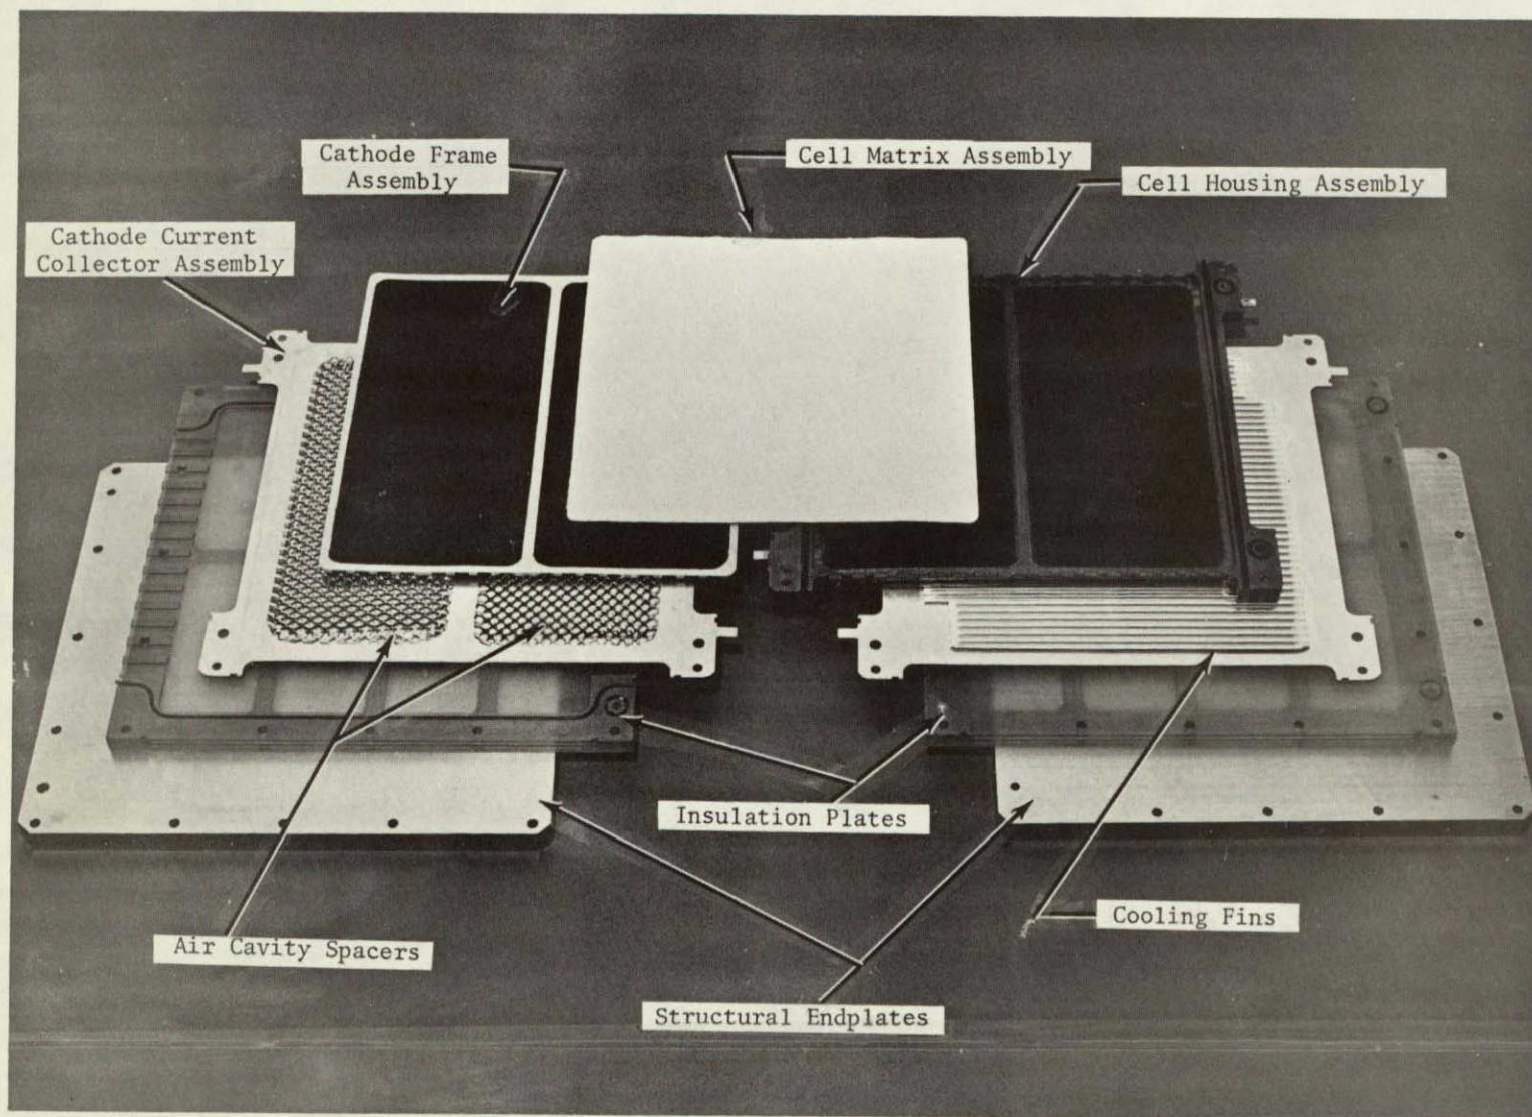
AEDCM SINGLE CELL WITH ENDPLATES
